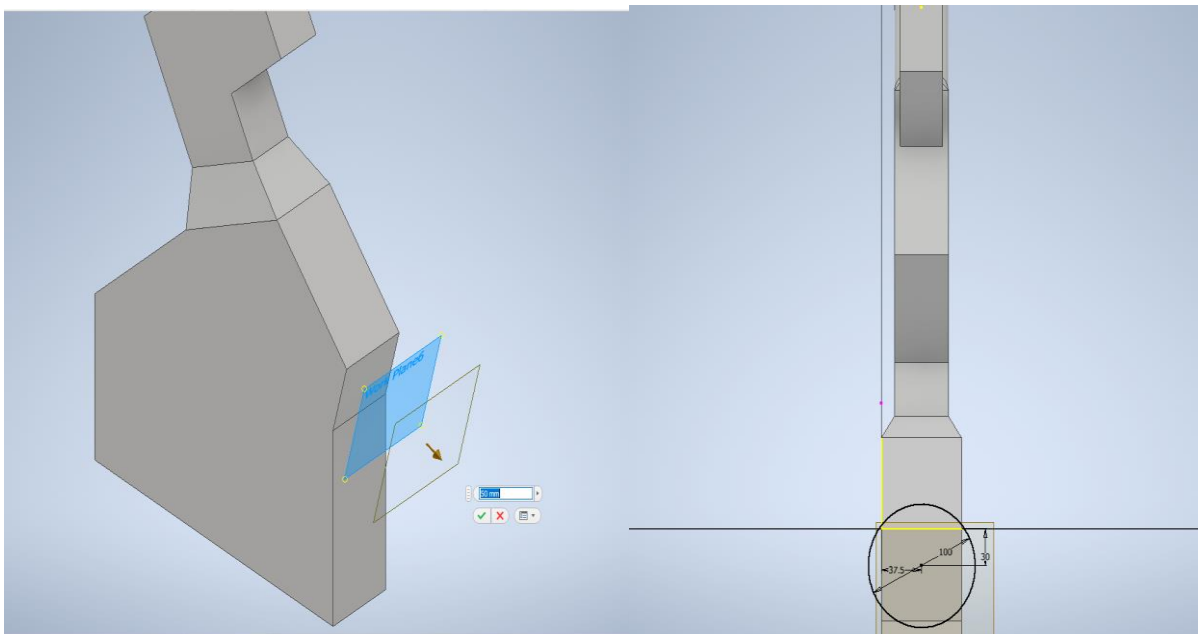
Drawing and Extruding the Circle for part of the Nozzle section
